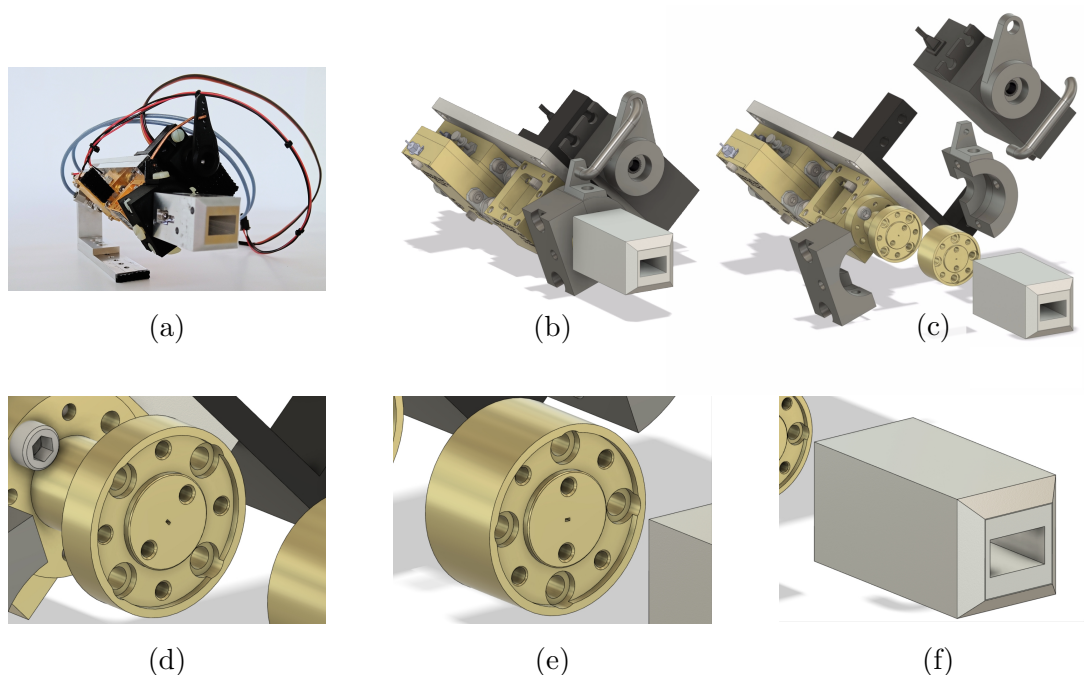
Phase-stable polarization changer in E_φ -orientation as (a) a photograph, (b) CAD model assembled, and (c) CAD model in exploded view. The details of (d) the static waveguide flange, (e) the rotated flange, and (f) the attached rotated horn antenna are depicted to highlight the waveguide orientation.
